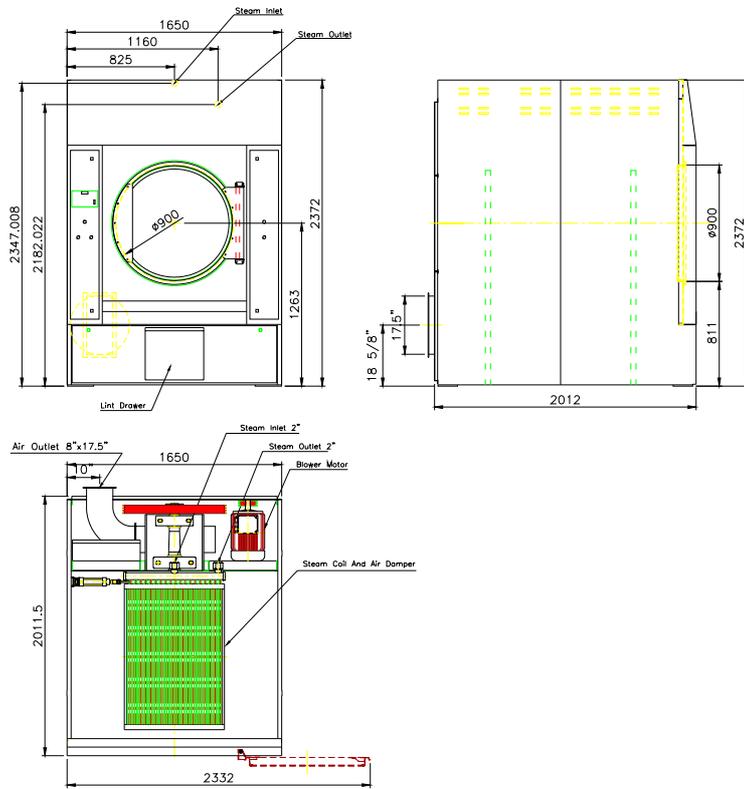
Dryer Model 200 lb. Technical Dimension
